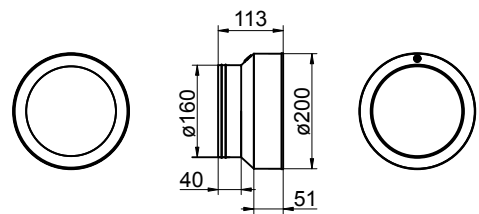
Dimensional drawing of DN160 adapter (dimensions in mm)
